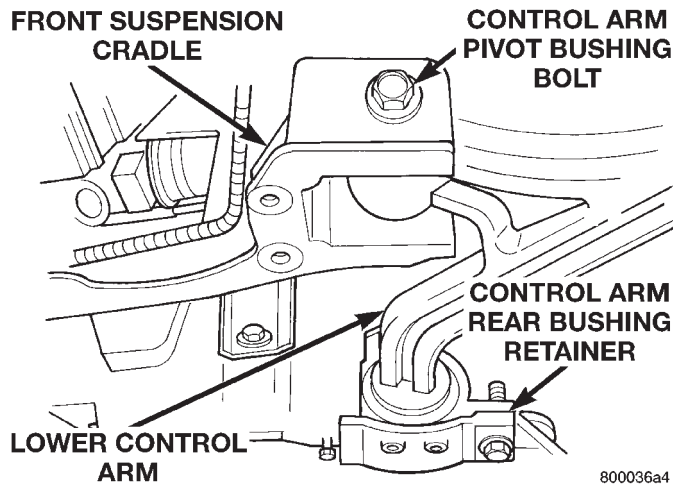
Lower Control Arm Bushing To Cradle Pivot Bolt
